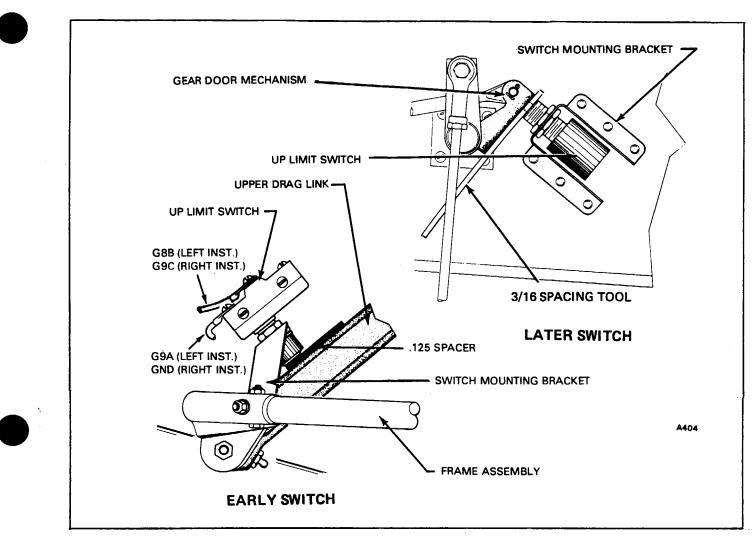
Adjustment of Main Gear Up Limit Switch
